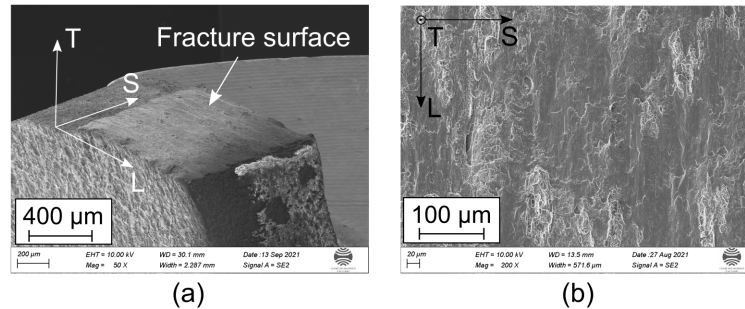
The flat fracture surface of aluminum alloy 2198-T8R under shear loading adapted after Kong et al. [2023a].
